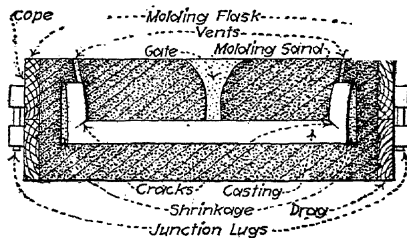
Shrinkage causes casting to crack in mold.
